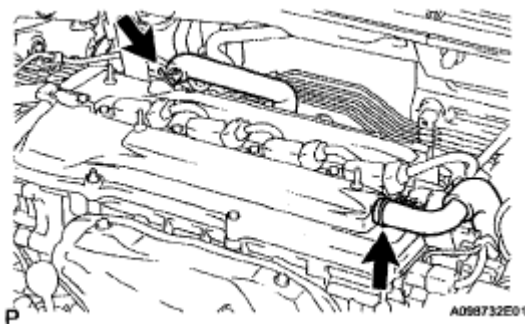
Locating Ventilation Hoses To Cylinder Head Cover
